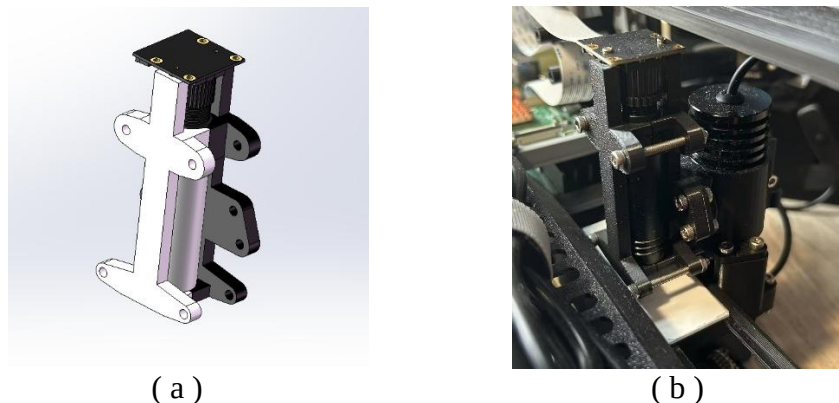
Illustration of clamping structure, a. Design file, b. Real assembly
